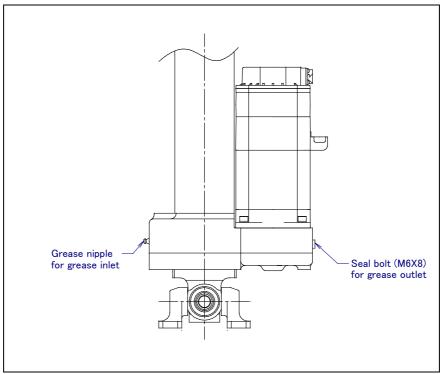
(b) Replacing grease of gearbox (J2,J5-axis)
